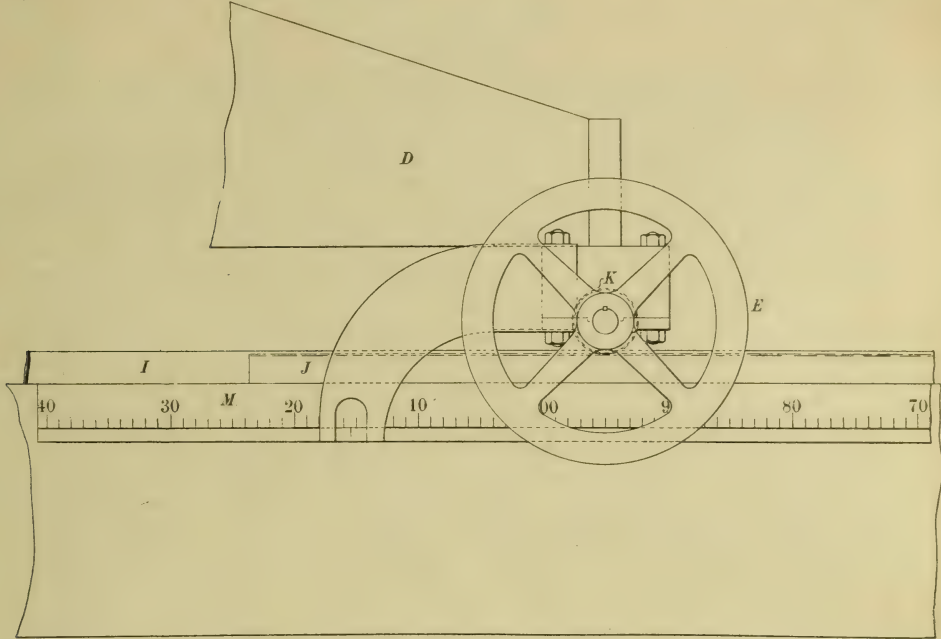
Rack and Scale for easel carriage—Enlarging Camera.
